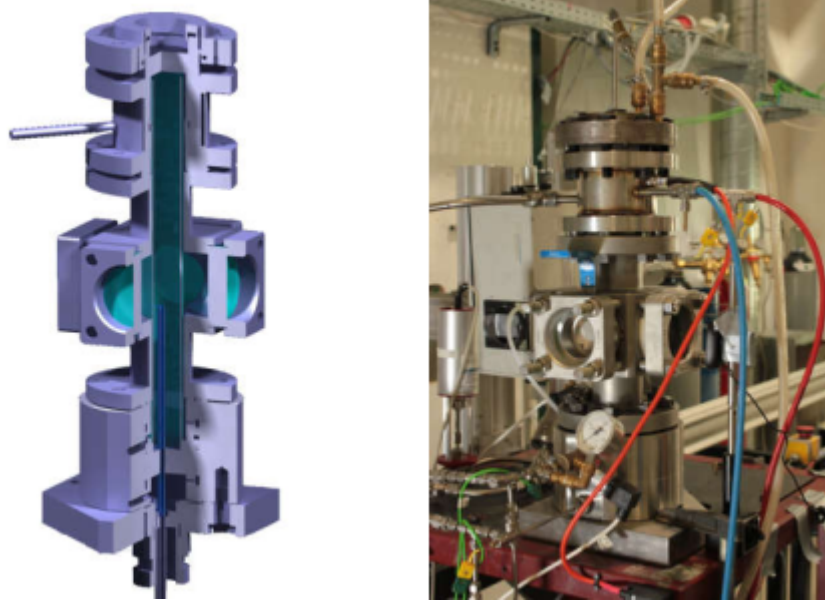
CAD and photography of final assembly of combustor used by Fiala [3].
